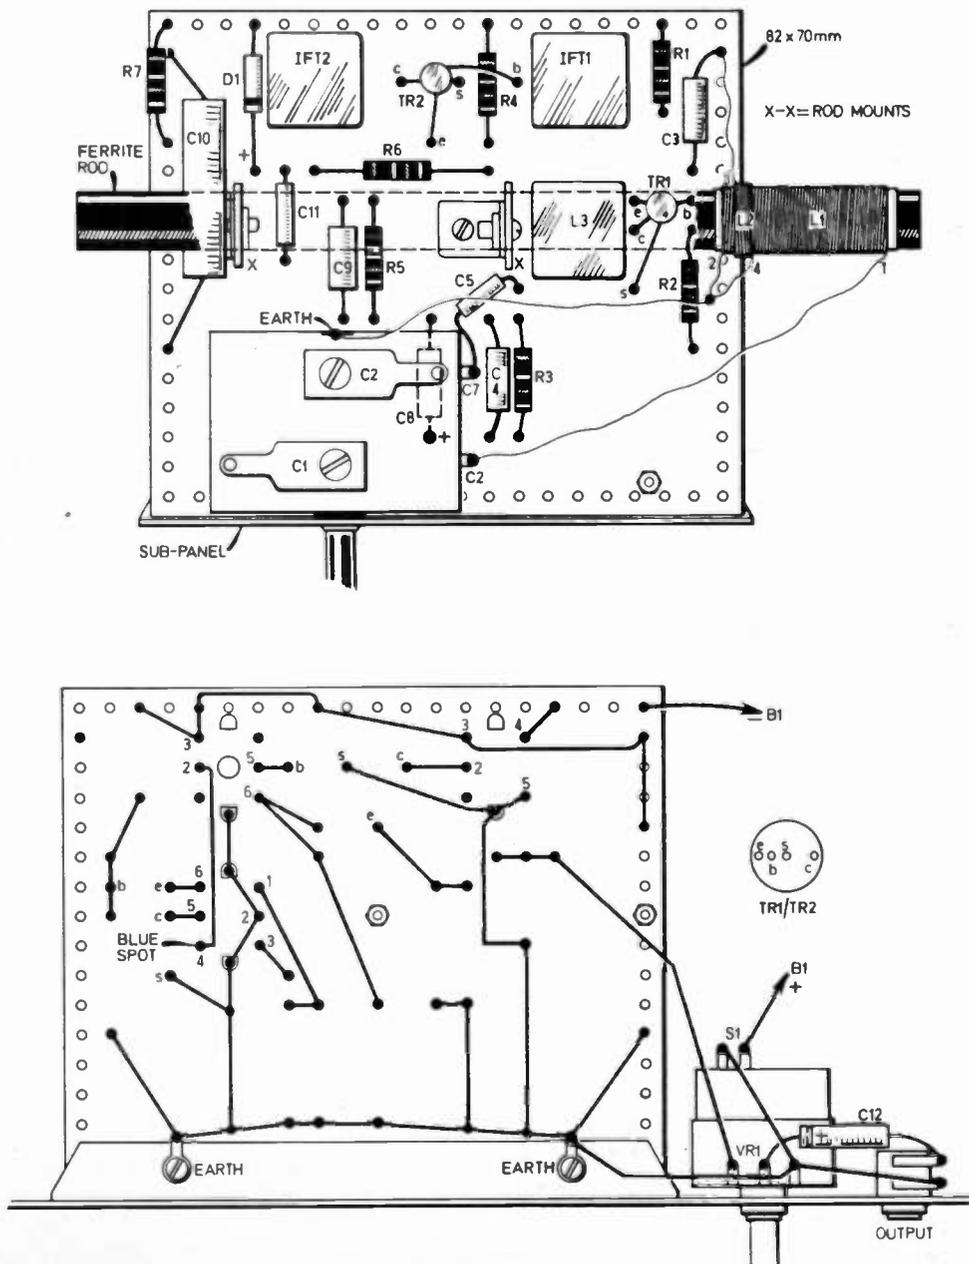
Complete wiring up and layout details on both sides of the component panel and case front panel.
